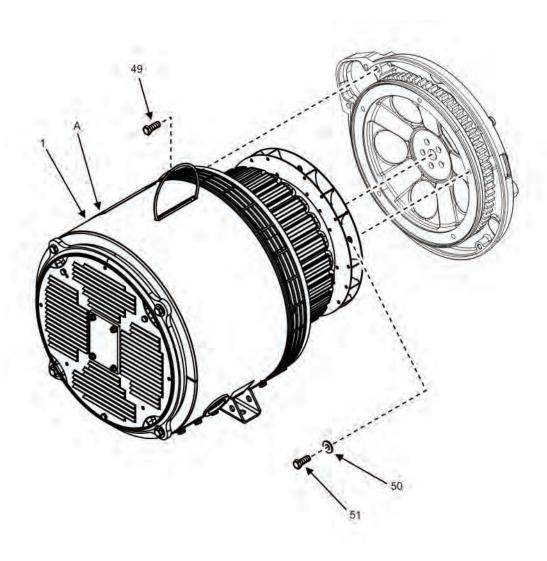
AC Generator Assembly, 400 Hz (Sheet 1 of 3).
